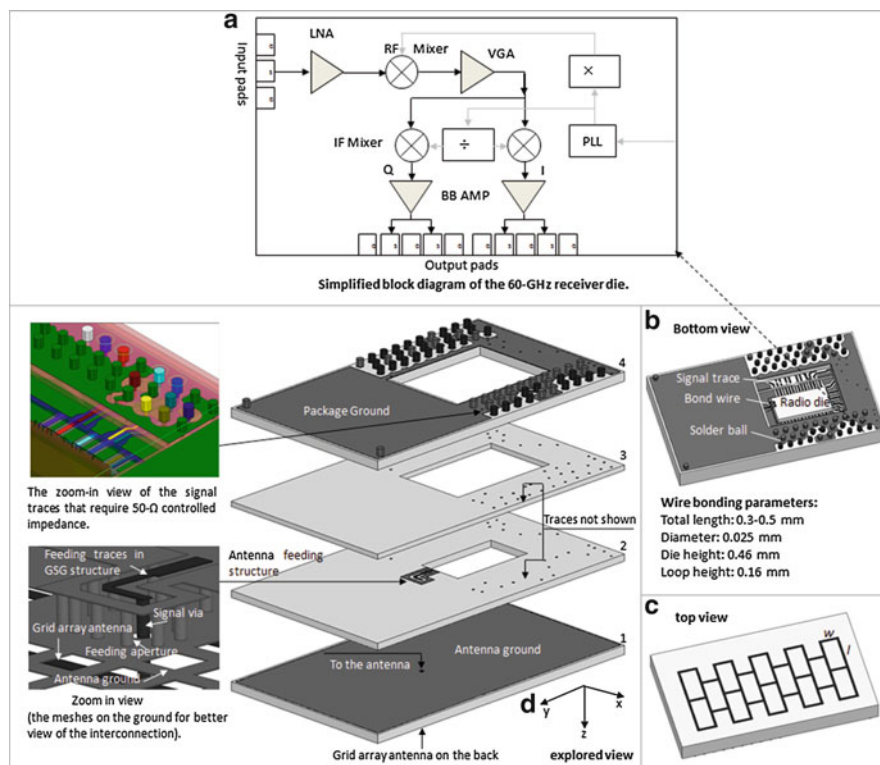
The views of the ball grid array package with a grid antenna array and a 60-GHz die: (a) the simplified block diagram of the 60-GHz receiver die, (a) top view, (b) bottom view, and c explored view of the whole package
